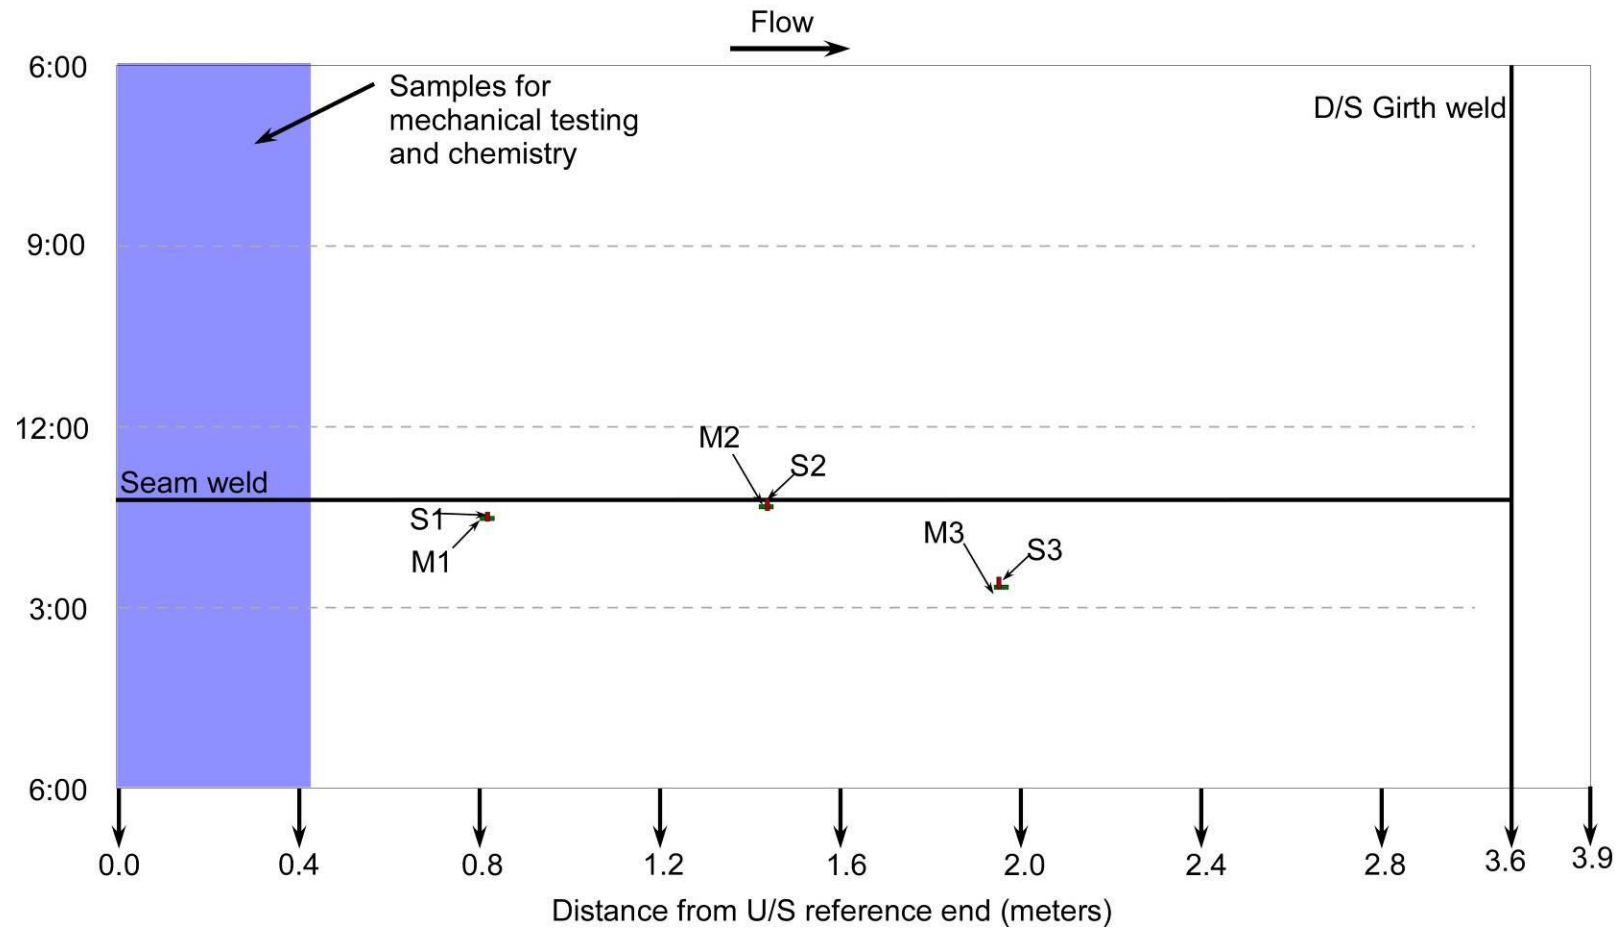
Schematic of pipe section showing the location of the seam weld and the locations where samples were removed for metallography (M1, 2, 3), fractography (S1, 2, 3), mechanical testing, and chemistry.
